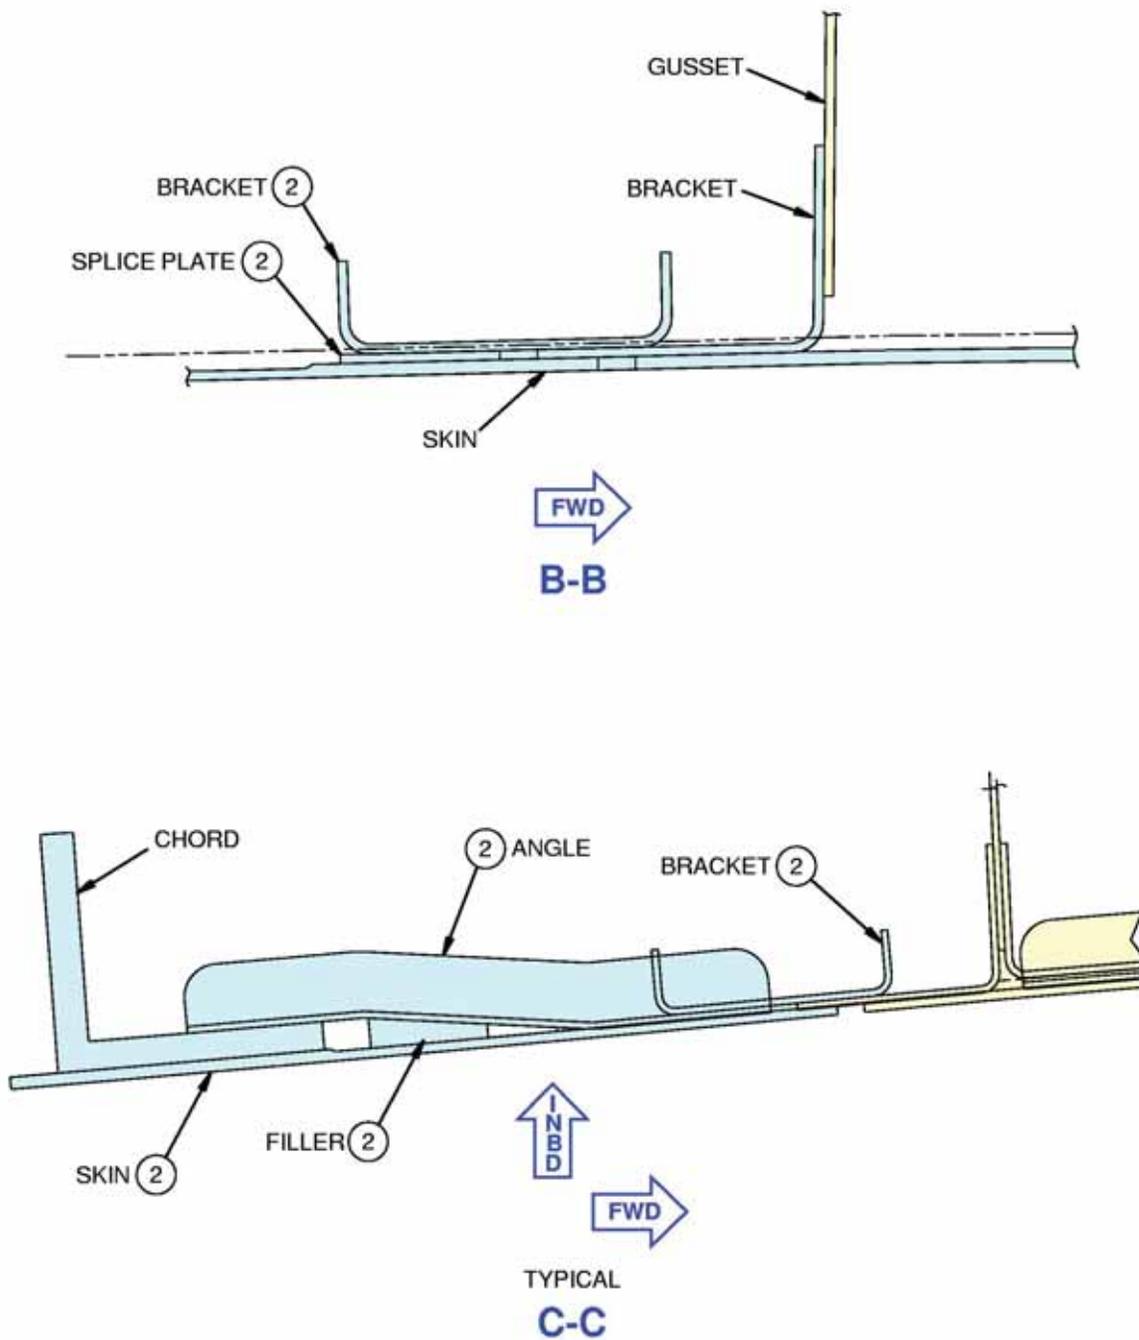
RIGHT SIDE - STA 2370 SKIN PANEL REMOVAL (SHEET 2 OF 4)
